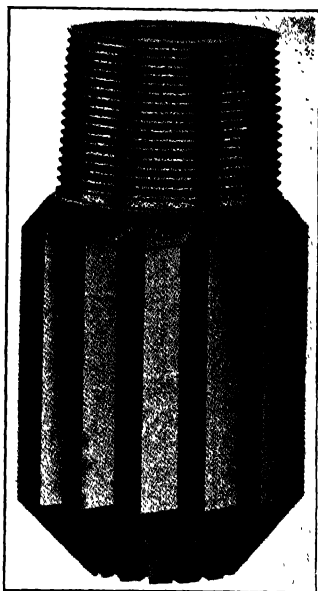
Hughes milling tool for cutting through and side-tracking casing
